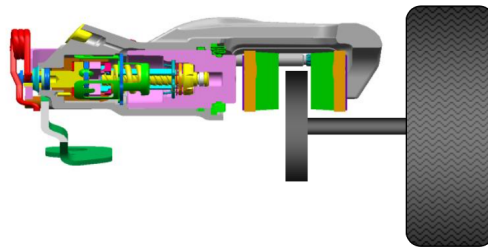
Schematic of the electro-mechanical brake with electrical engine on left hand side, brake disc connected to wheel on right hand side and brake caliper around the brake disc [51].
